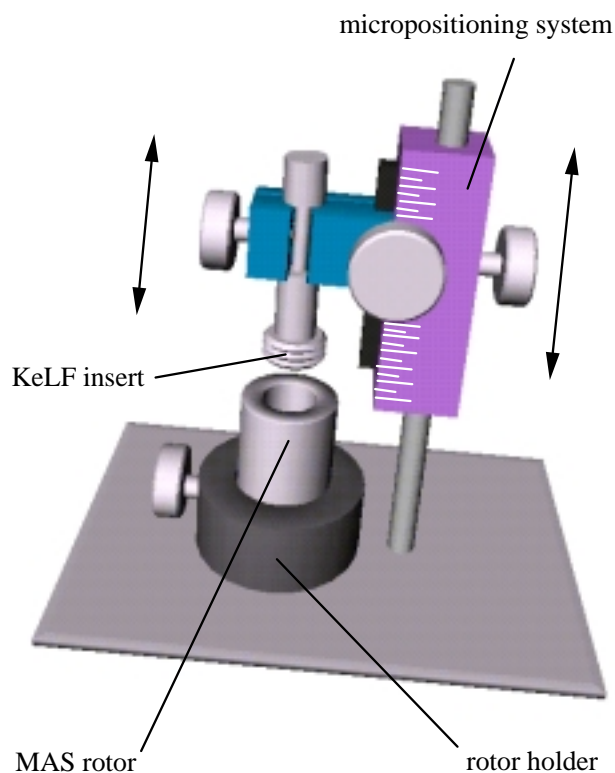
Once the disks are transferred into the rotor, an insert has to be placed on top to guarantee a stable sample position under spinning conditions. The inserts were inserted and extracted using a simple single axis micropositioner system, which allowed placing the insert at a specific height in the rotor, i.e. exactly on top of the top disk. This precaution is necessary to prevent damaging the disks by applying accidentally too much pressure.
